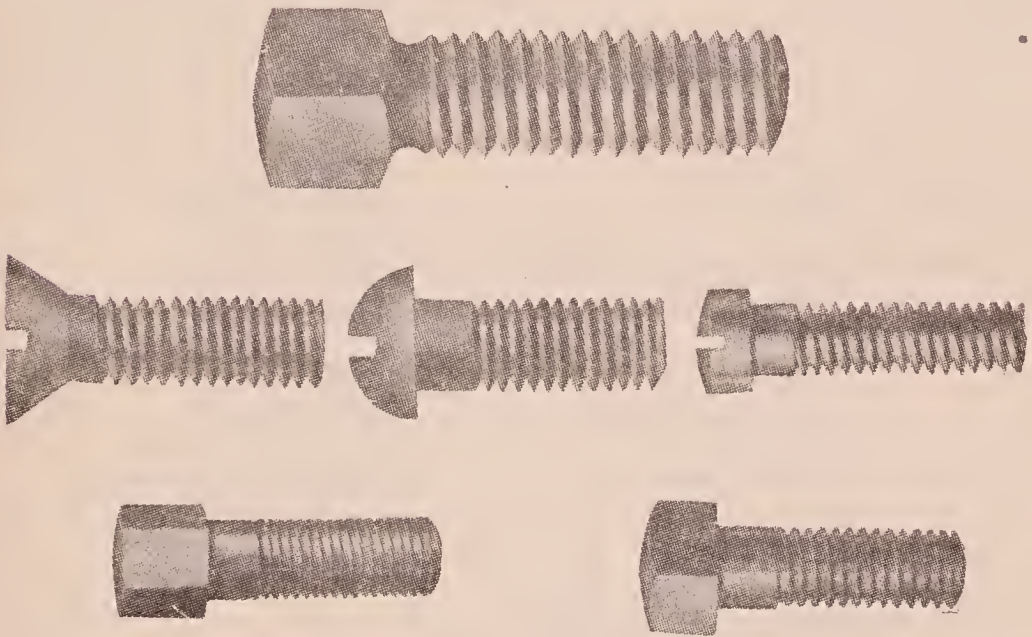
Six kinds of machine screws: Set screws; counter-sunk, round head and fillister head machine screws, and hexagon and square cap screws.
